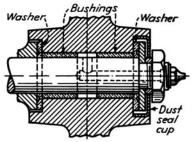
The labyrinth seal shown does not rely on nonmetallic materials but on the small clearances with the assembly. A steel washer contacting a bronze thrust washer is clamped against the shaft shoulder after the formed dust seal cup is pressed into the counterbored hole.
